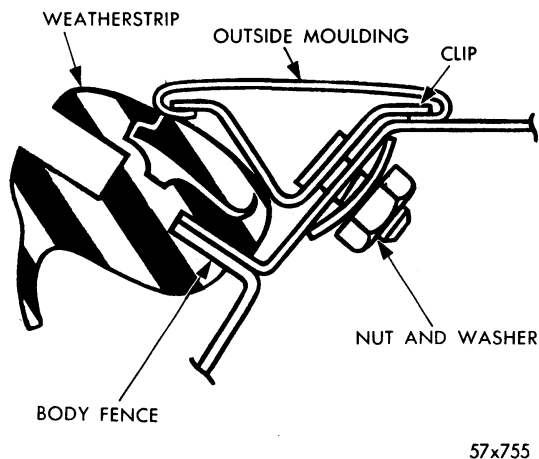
Upper Rear Window Weatherstrip and Moulding
